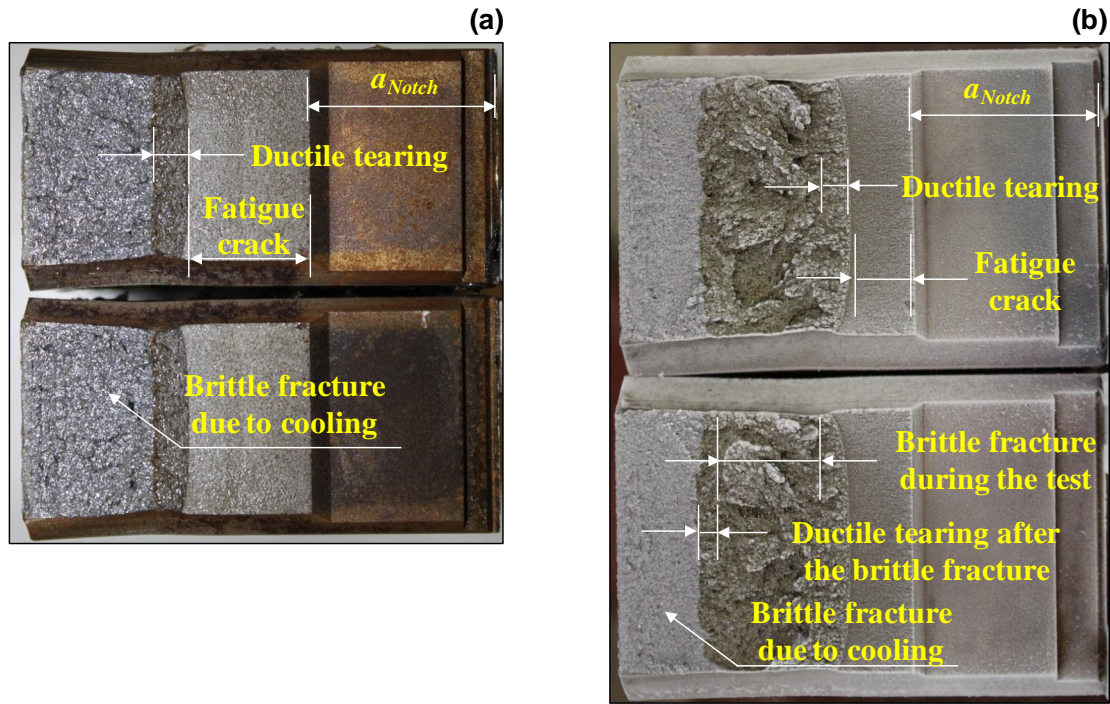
Fracture surface after the breaking under the subzero temperature for the SE(B) specimen with the thickness: (a) $B = 25.4$ mm and (b) $B = 50.8$ mm.
